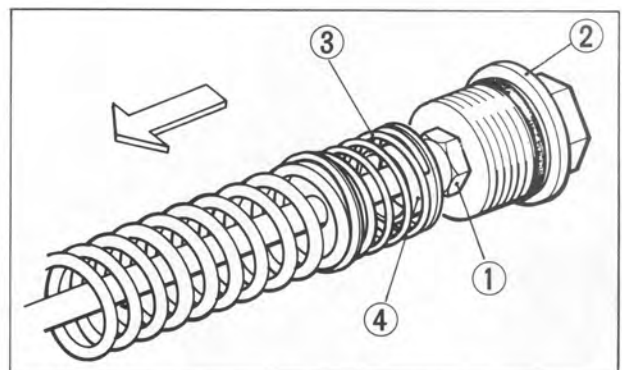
(1) Lock nut (2) Fork bolt (3) Spring
